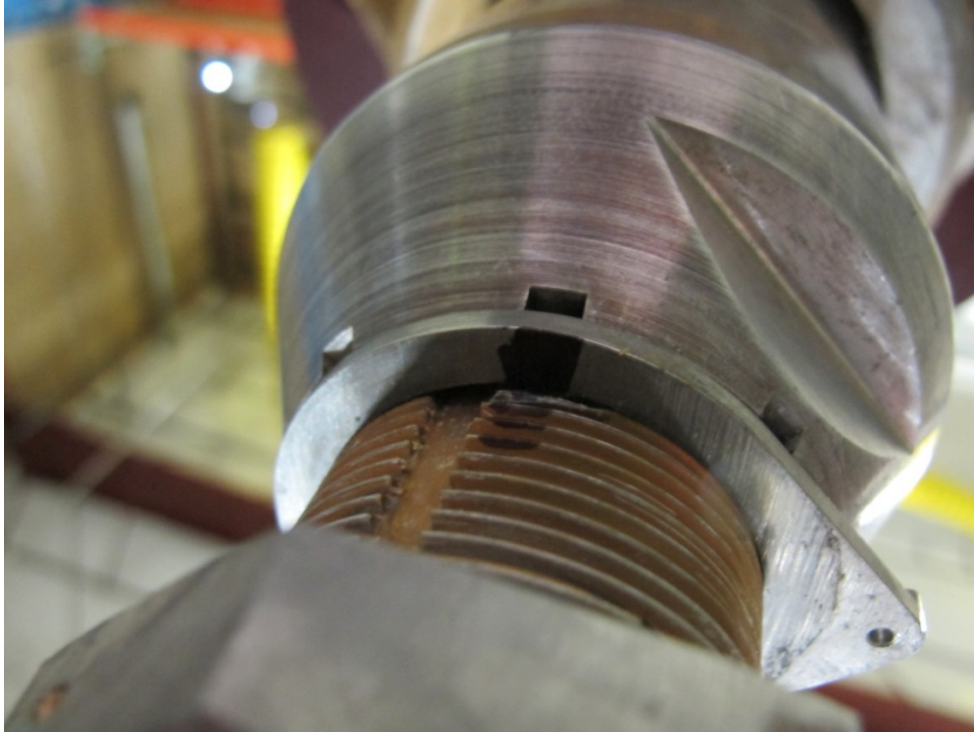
Displacement of the reluctor key (black mark) with LH rod end groove
